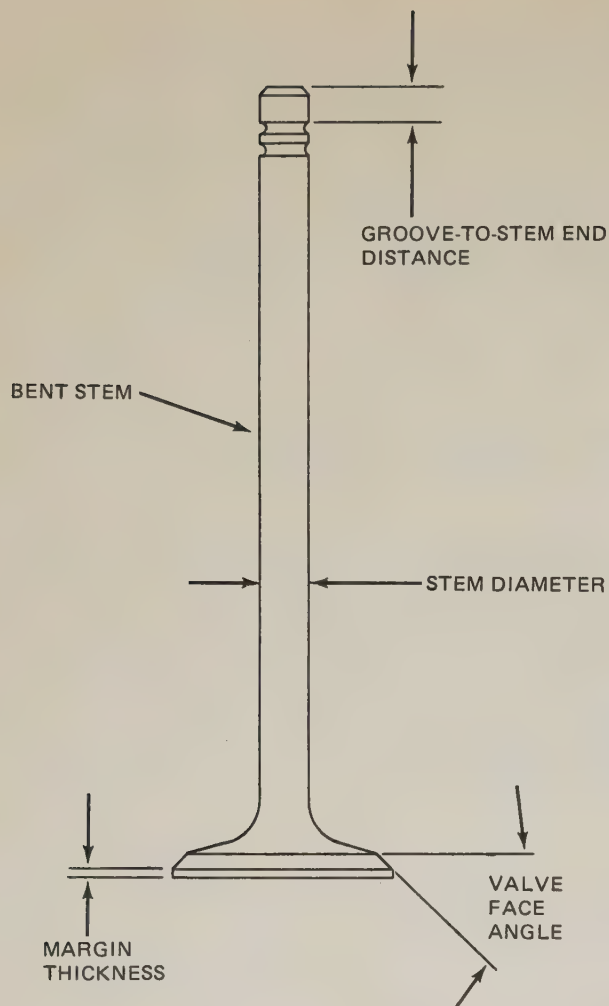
Parts of the valve to be checked. For the dimensions, refer to the manufacturer's specifications.
